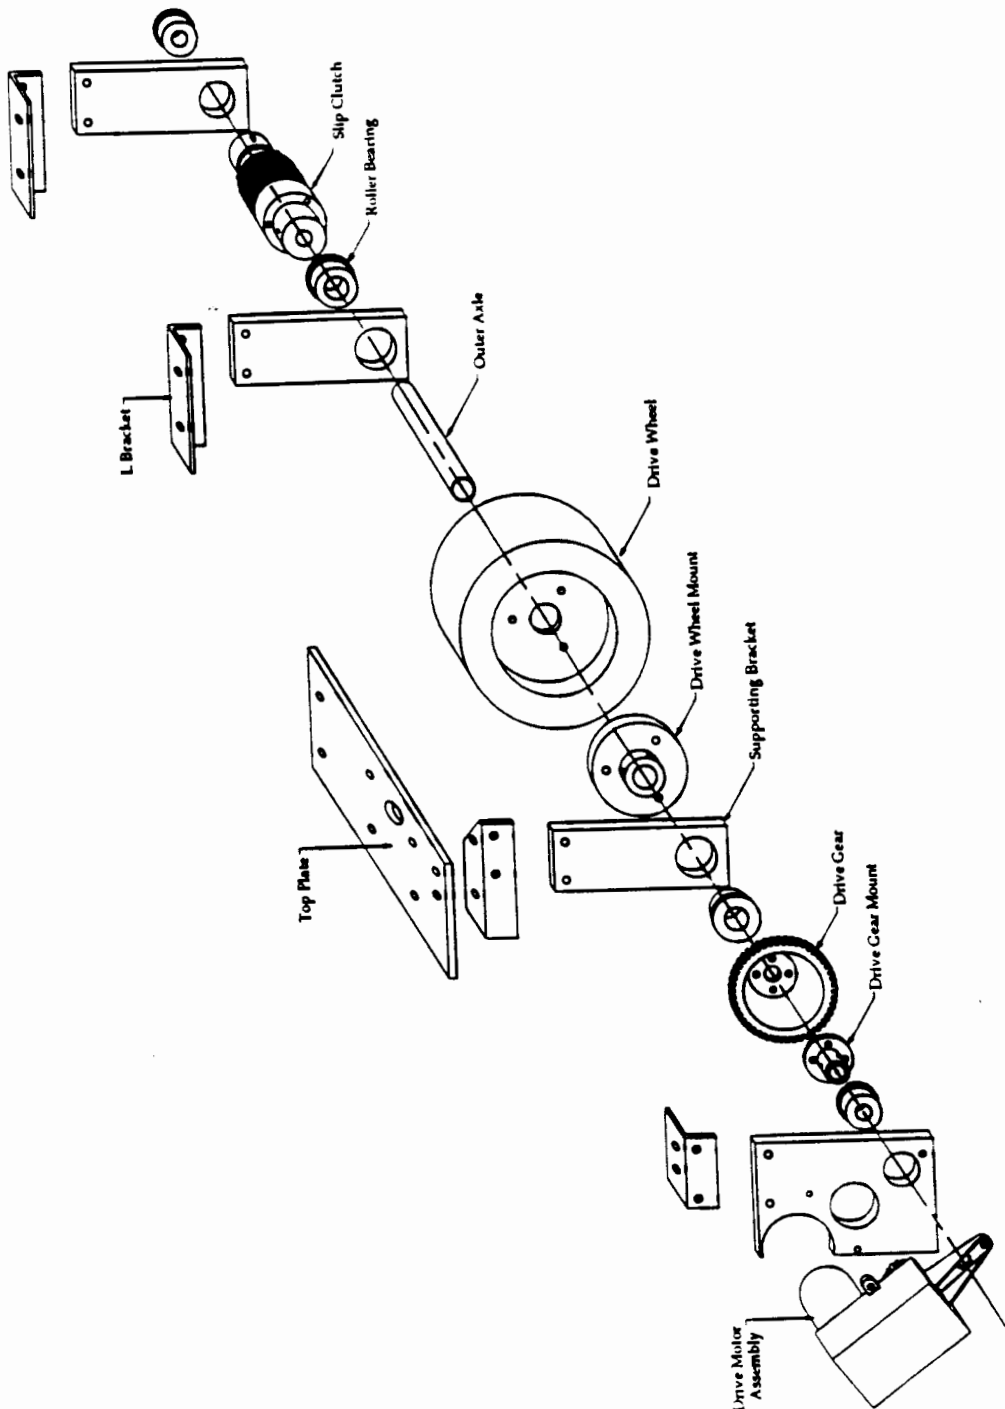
EXPLODED VIEW OF THE DRIVEWHEEL ASSEMBLY
